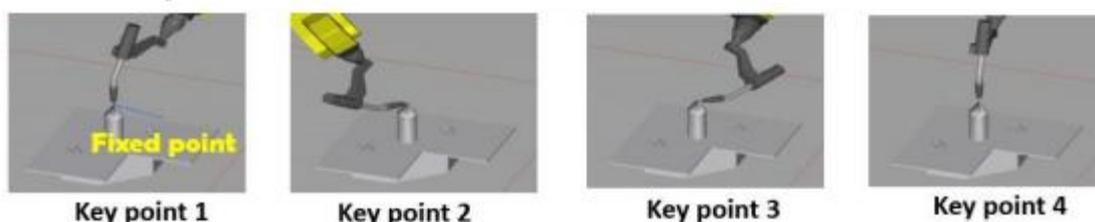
Sharp cone end of workpiece is used as reference point to establish TCS
